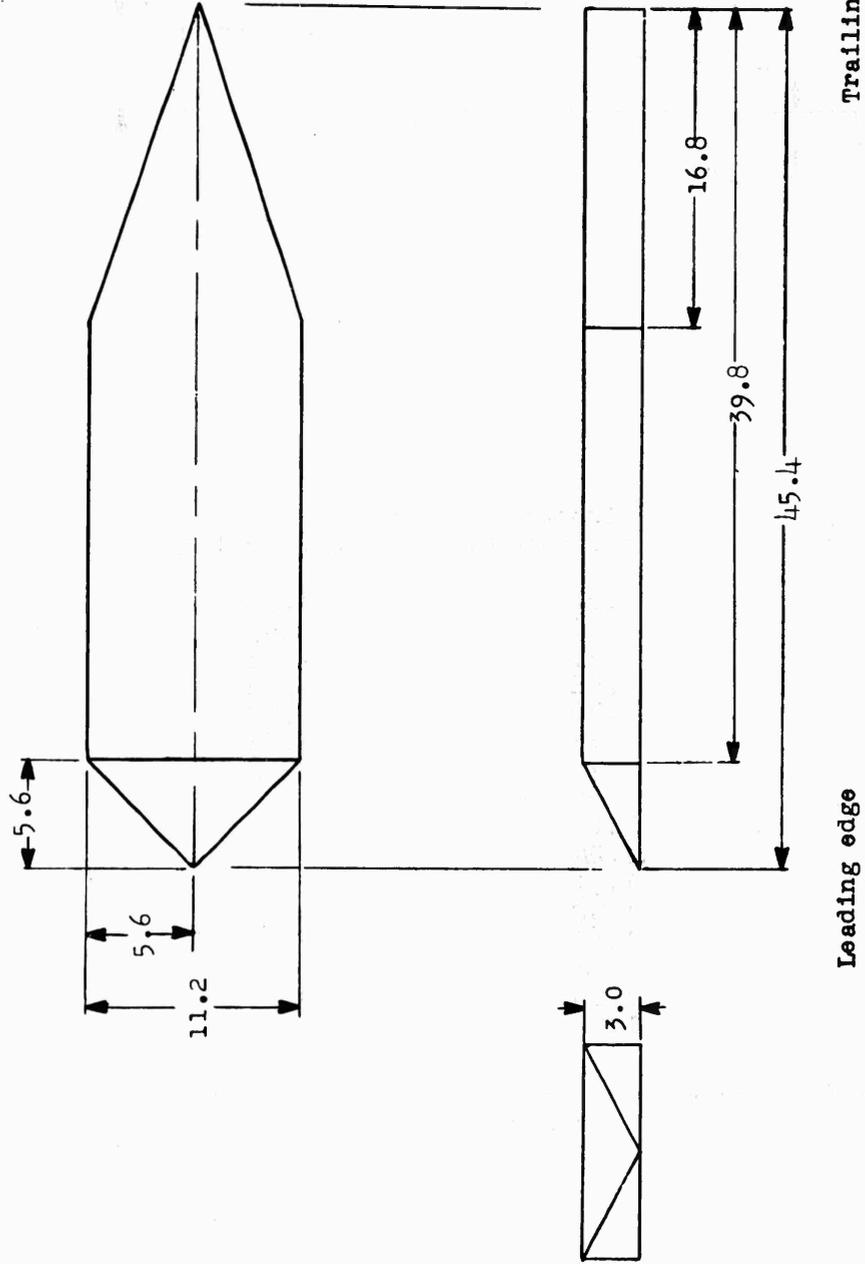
Hydro-ski details. All dimensions are in inches, full size.
